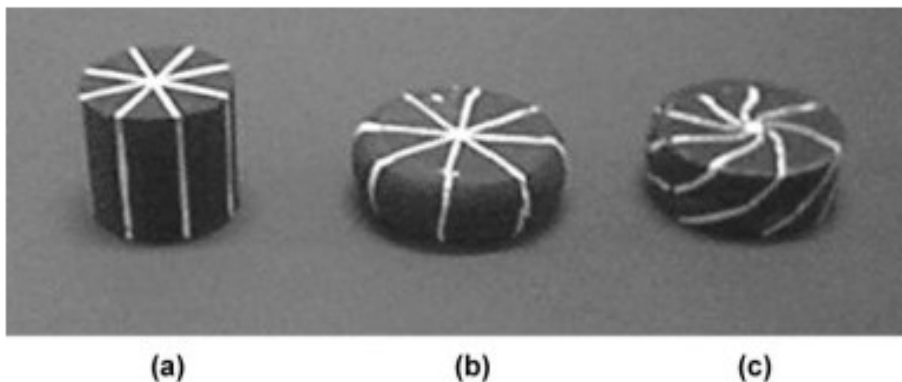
Photograph of plasticine specimens: (a) initial workpiece, (b) conventional forging and (c) rotational upset forging (J. H. Park et al., 2001) [46].
